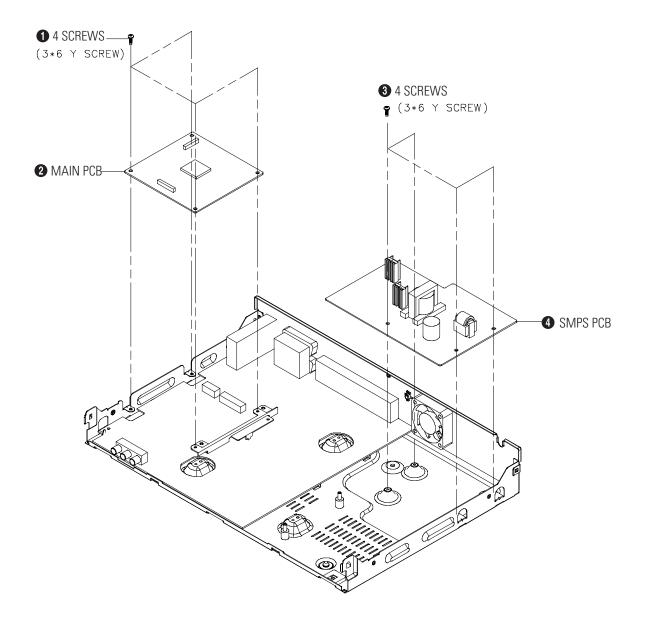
Main PCB and S.M.P.S. PCB Removal
